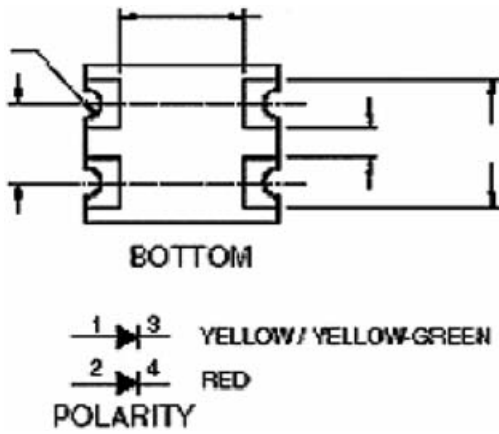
The package dimensions drawing (bottom and polarity) of an LCD backlighting application
